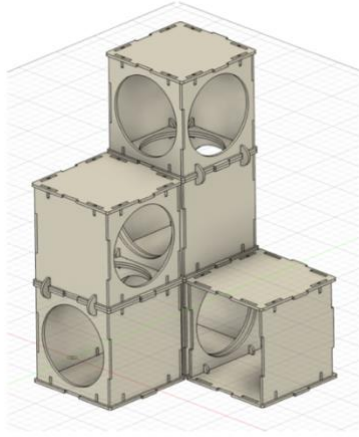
The 3D model of the cat castle in Autodesk Fusion 360 (left)
